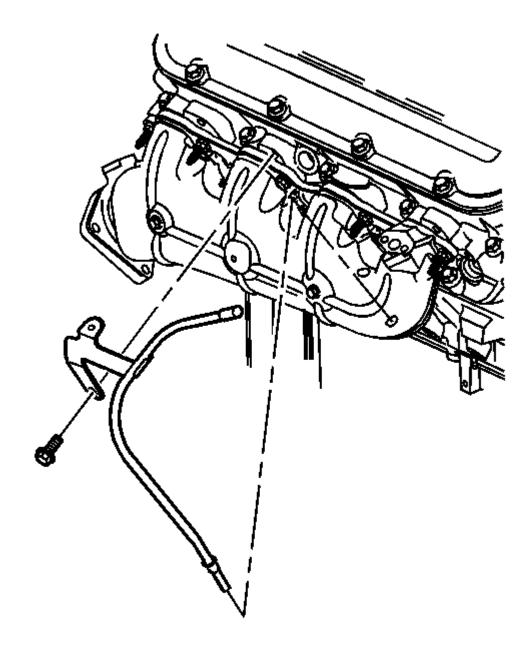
View Of Oil Level Indicator Tube Bolt Courtesy of GENERAL MOTORS CORP.
